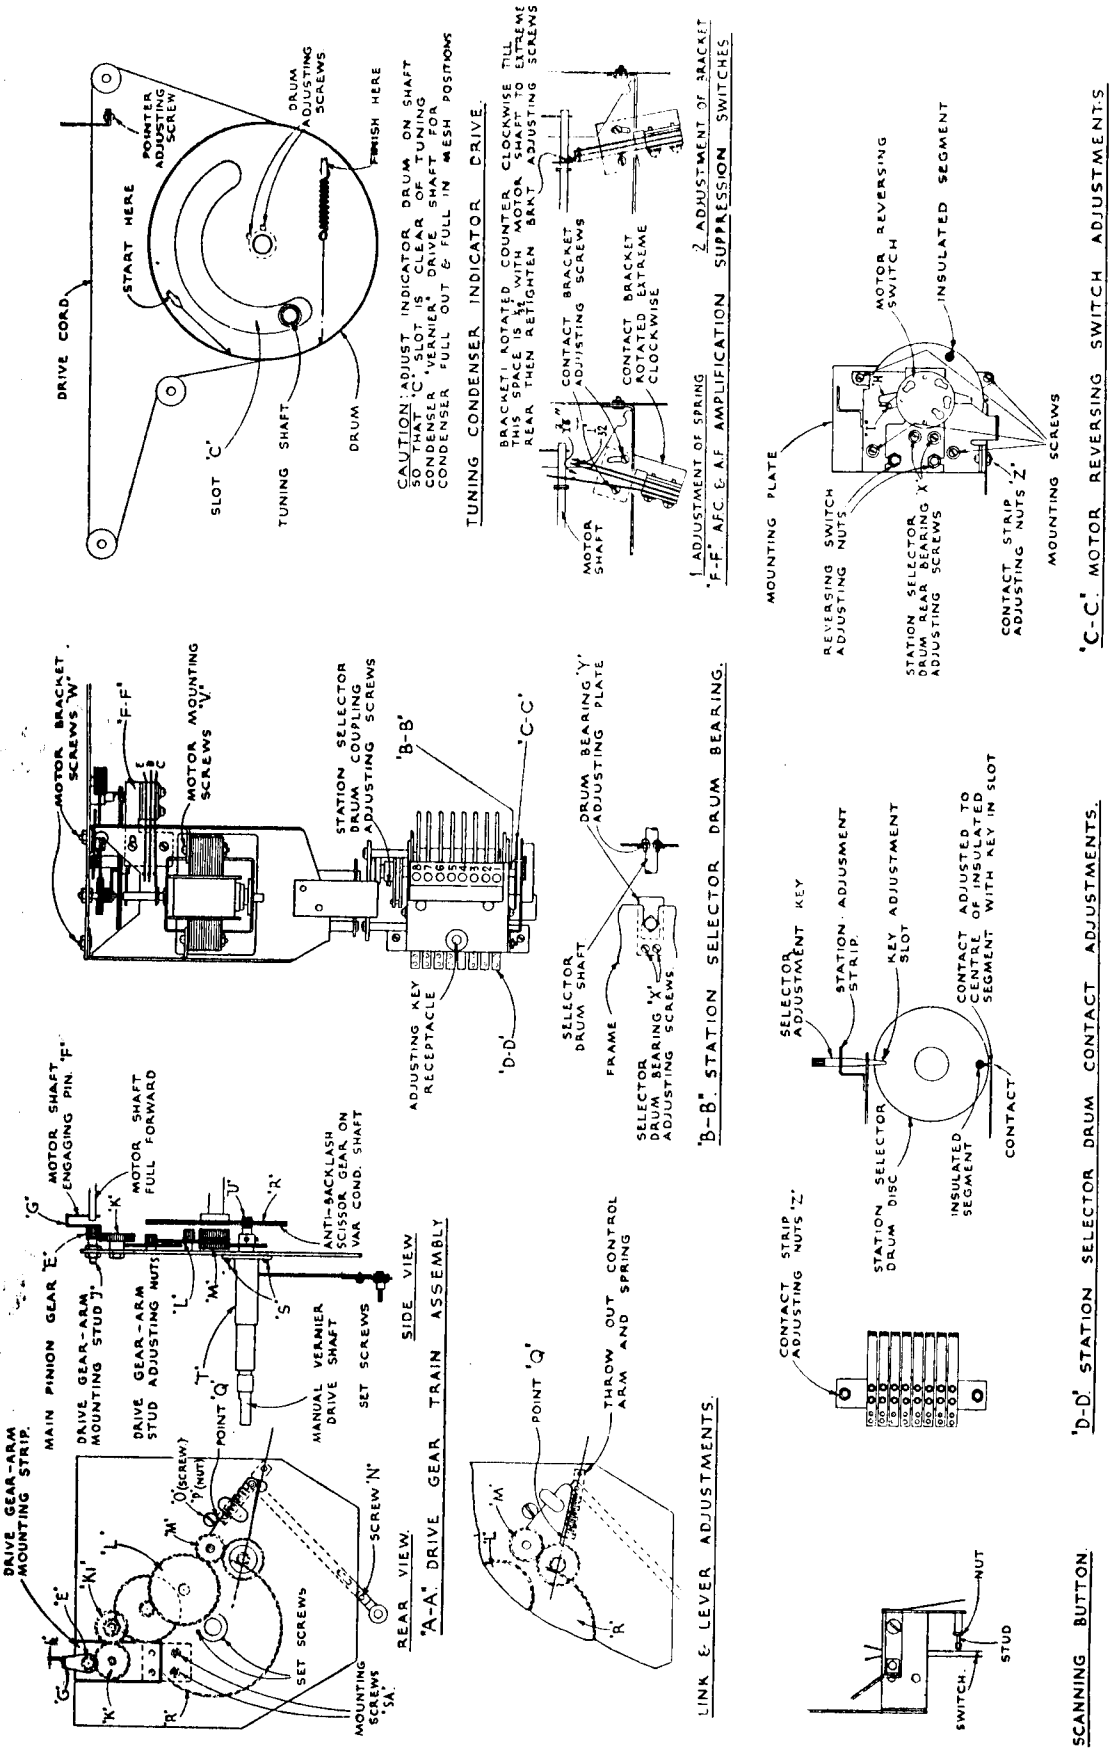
"Automatic Tuning" Mechanism Adjustments.
